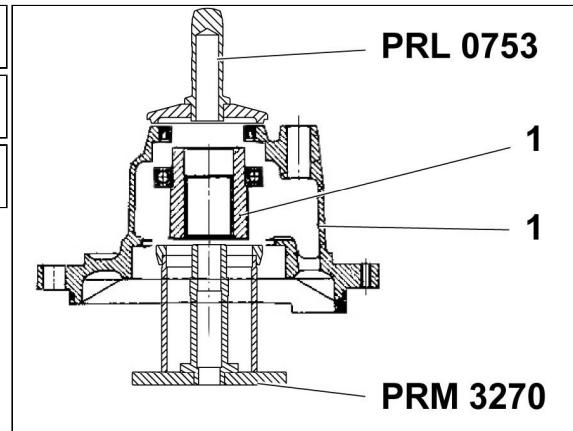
Pressing-in of the front drive carrier into the front drive shift mechanism cover
